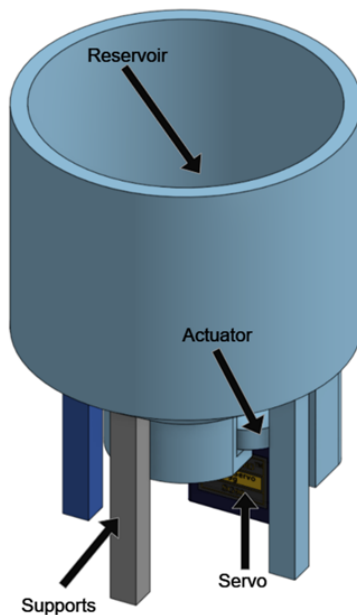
Watering mechanism CAD diagram. Labeled picture of the CAD (Computer aided design) model used to 3D-print the required parts of the mechanism.
